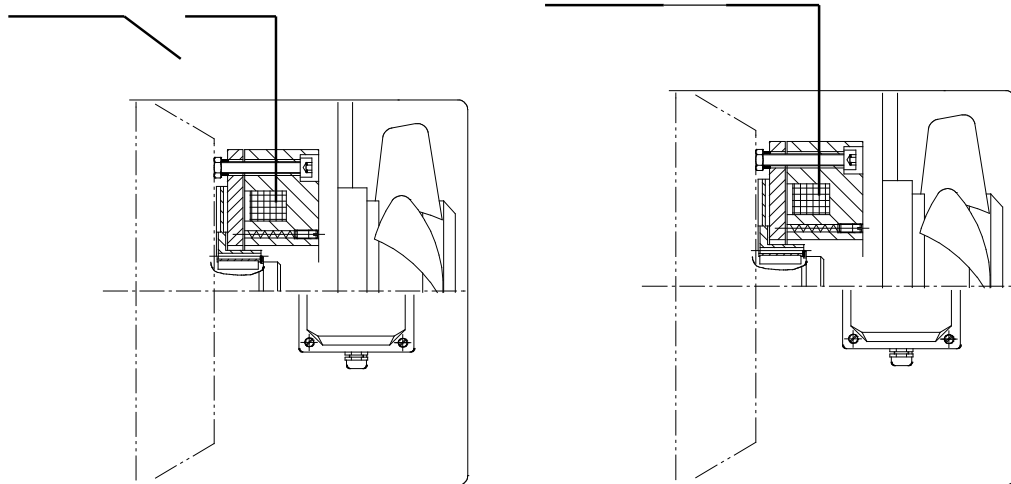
Apply the electromagnetic brake Fig. 6-20 b Release the electromagnetic brake
